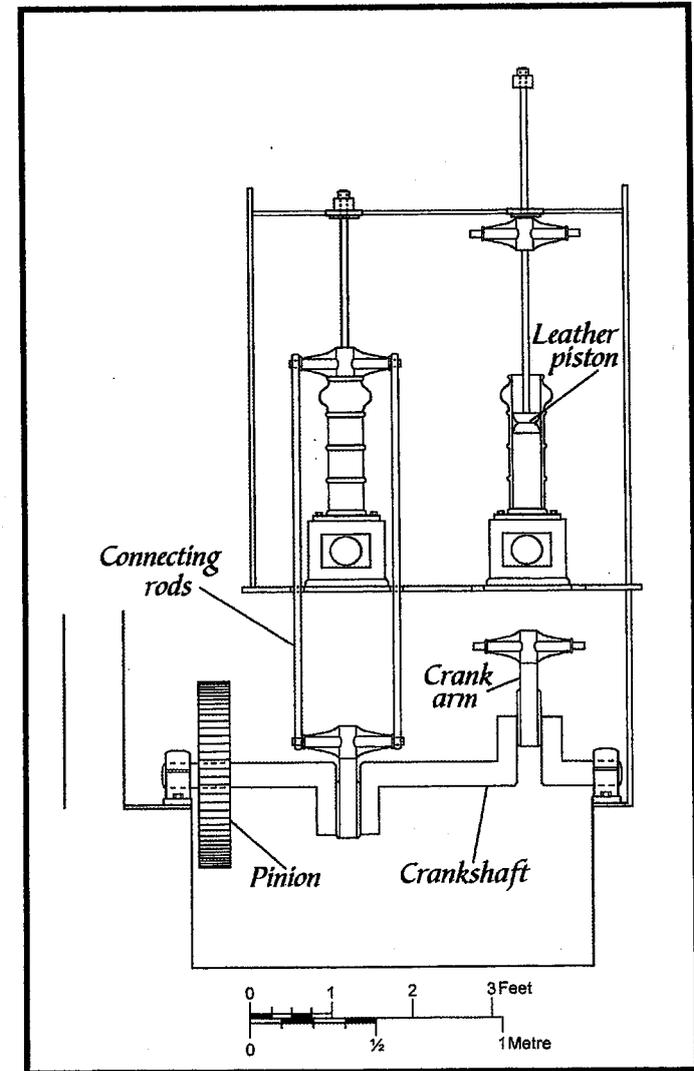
A sectional view, AA, of two pump cylinders with their crankshaft and crank arms, together with one set of connecting rods shown attached to the crank arm and the crosshead on top of the piston rod. (currently, although connected to the crosshead, the only pair of crank arms are disconnected from their crank arm.)
